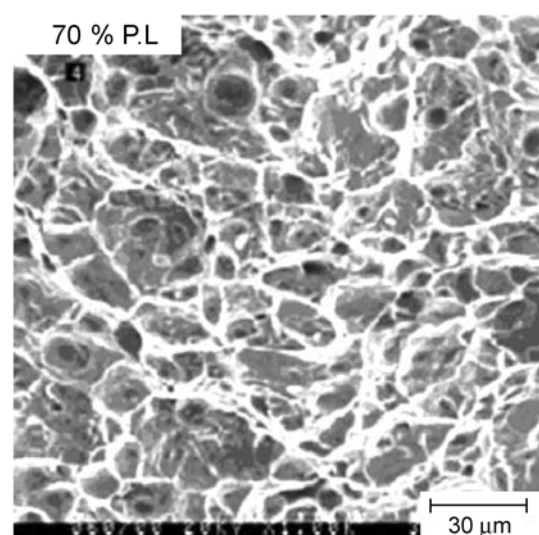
Fracture surface of the sintered compact with 70 % powder loading.
